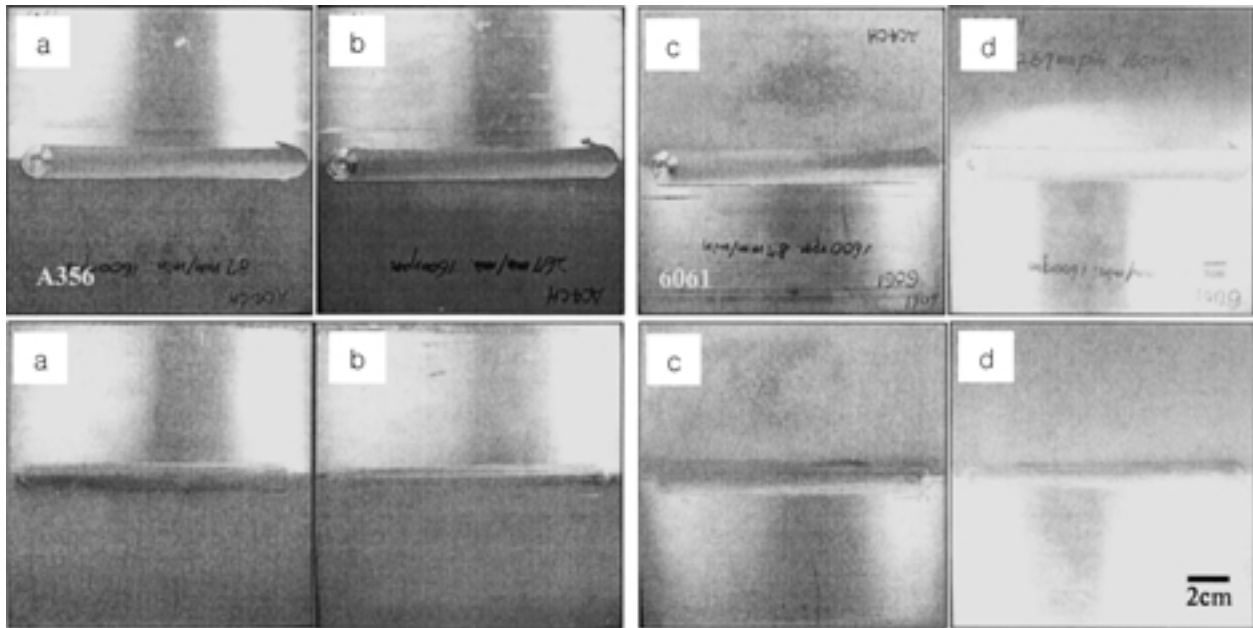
Photos of weld surface with various welding condition (upper: upper surface, below: rear surface): (a) 87 mm/min, (b) 187 mm/min: condition A, (c) 87 mm/min, and (d) 187 mm/min: condition B.
